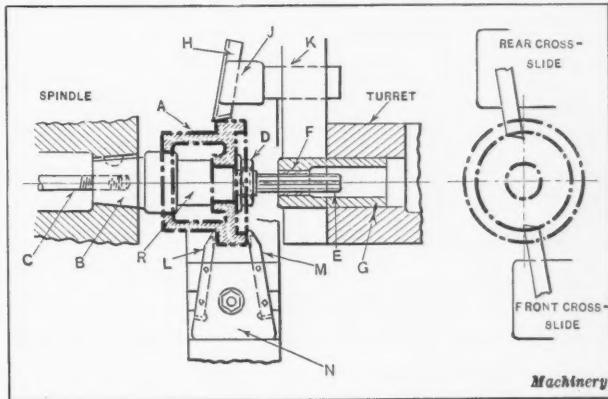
Turret Lathe Tool Lay-out for Final Operations on Part shown at A
